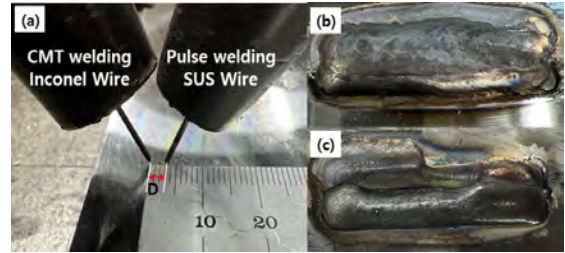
(a) Process setting, (b) First welding torch - CMT, (c) First welding torch - Pulse
